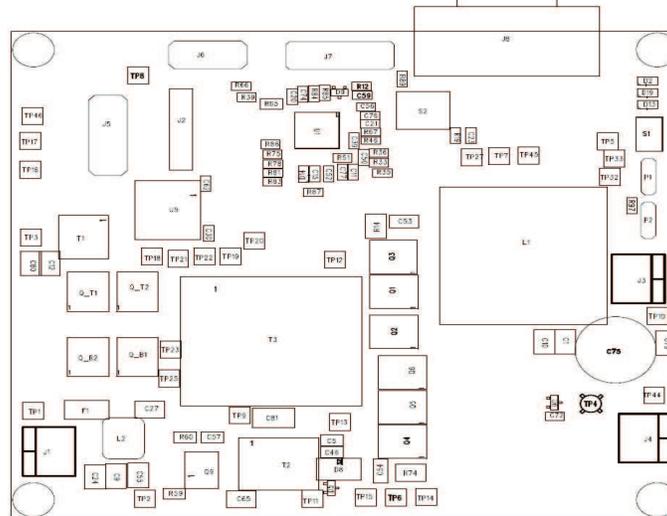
UCD3138HSFBEVM-029 Top Layer Assembly Drawing (top view)
